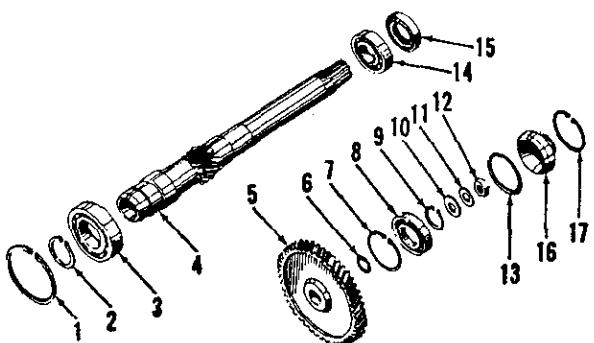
Exploded view of pto driving shaft, driven gear and their component parts.
